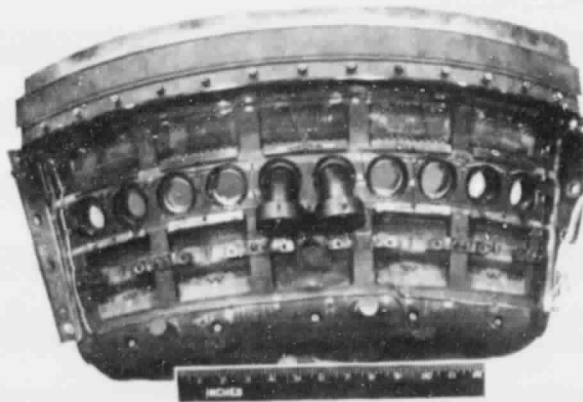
P&WA E<sup>3</sup> 90° sector combustor assembly featuring segmented liners.
